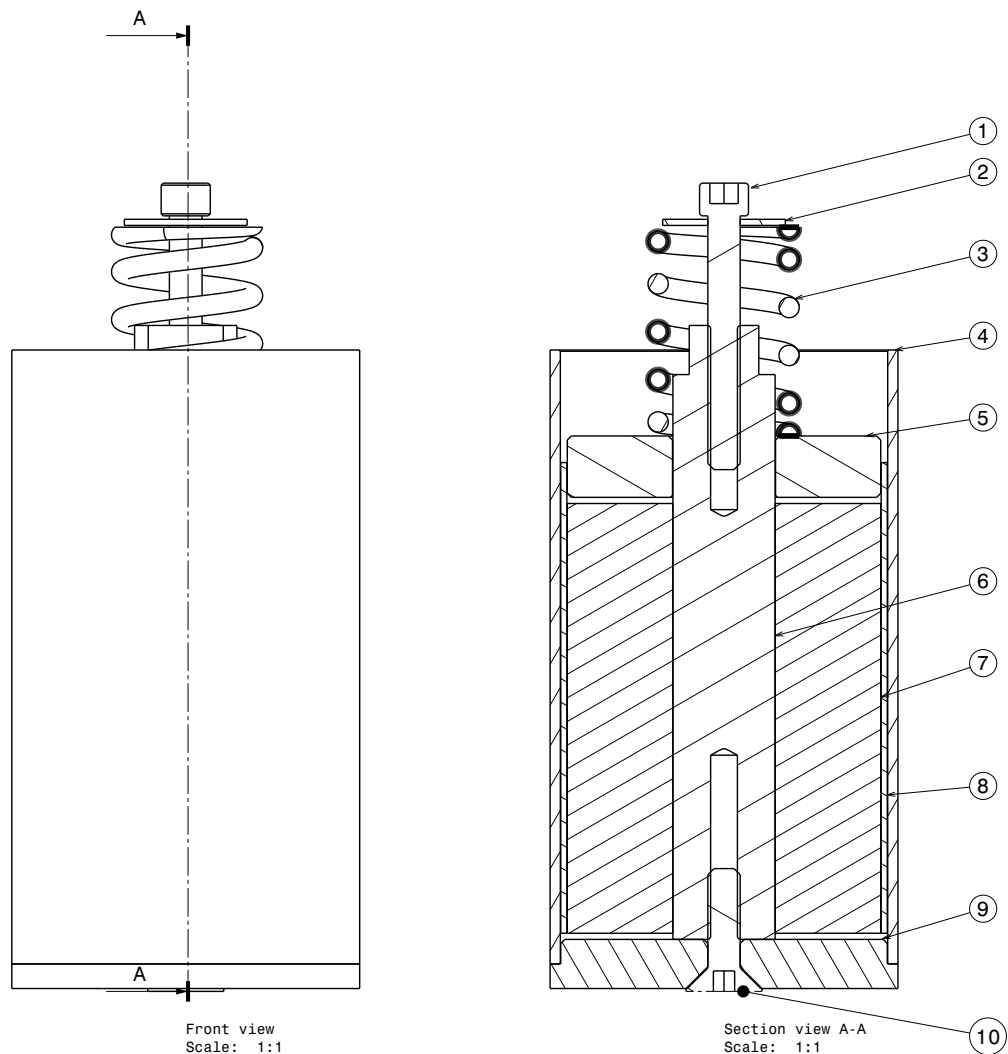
Casting Equipment with BEM propellant grain. (1) 70mm M8 Hex, (2) 35mm×1.5mm M8 Washer, (3) FIBRO compression spring, (4) Aluminium Mould Tube, (5) Aluminium Plunger, (6) Aluminium Mandrel, (7) BEM Grain, (8) Cardboard inhibitor tube, (9) Aluminium base, (10) 30mm M8 countersunk Hex.
